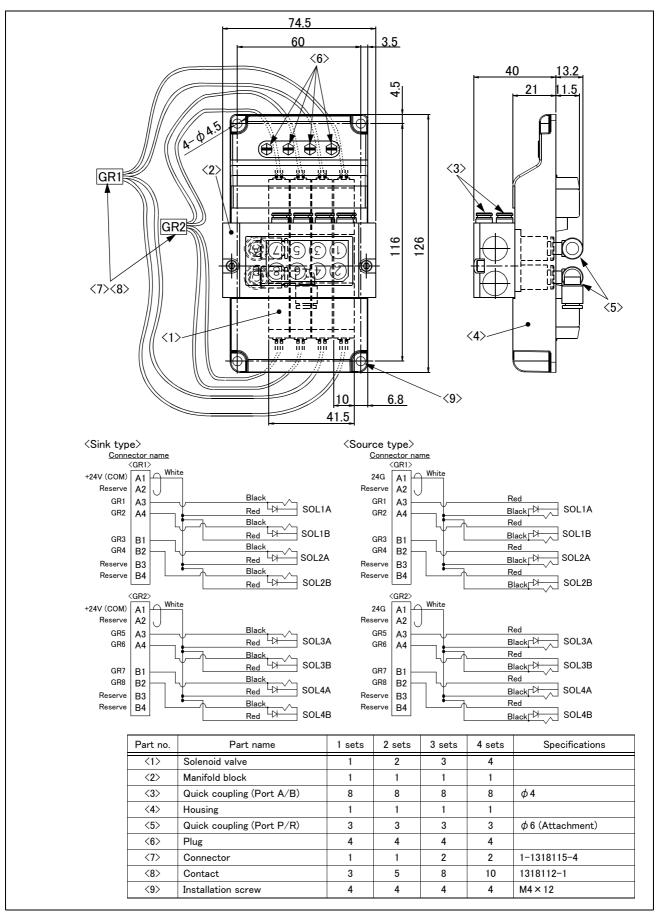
Outline dimensional drawing (1F-VD0*-02/1F-VD0*E-02)
